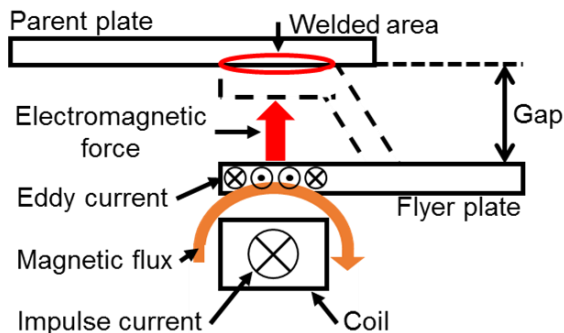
Schematic diagram of magnetic pulse welding.
